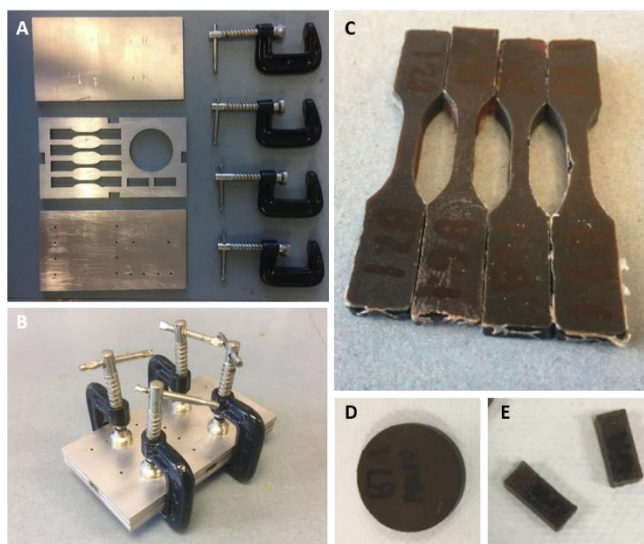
Reaction injection molding of oxaPDCPD. A: laboratory-scale RIM apparatus consisting of shaped aluminum blocks that can be clamped together to form a mold. B: assembled mold, with sprue holes for injection of resin. C: ‘dogbone’ shaped oxaPDCPD bars for tensile testing. D: oxaPDCPD disk for impact testing. E: oxaPDCPD bars for DMTA analysis.
